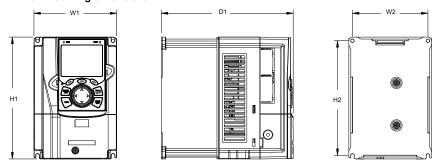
Wall-mounting diagram of inverters of 380 V, 1.5 to 37 kW
